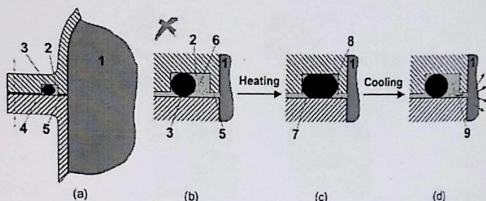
(a) A conventionally designed right-angled groove (2) contains an O-ring (3) that is compressed between the sealing faces of two stainless steel surfaces (4) to separate the product area (1) from the outside. (b) Such a rectangular groove-O-ring design invariably creates gaps and crevices (5) that are impossible to clean in-place and/or to sterilize in-place. The groove provides sufficient space for microorganisms (6) to enter via the crevice. (c) During heating, due to the difference in thermal expansion between metals and elastomers, the O-ring will expand (7) to cover an increasingly larger surface of steel, protecting microorganisms (8) trapped between the O-ring and the steel surface against contact with hot water, chemical solution or steam. (d) After cooling down and shrinkage of the seal, the surviving microorganisms may be released (9) and will multiply and contaminate the product (Lelieveld et al., 2003; Hauser et al., 2007).
